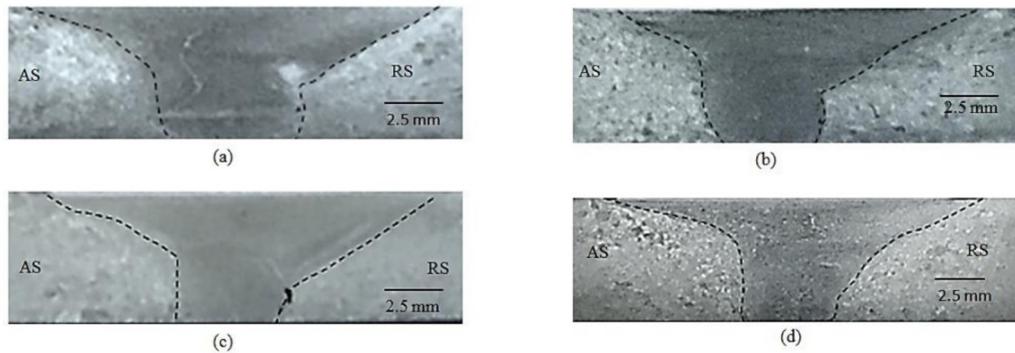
Experimental weld zone: (a) T1: Cylindrical pin tool; (b) T2: Conical pin tool; (c) T3: Cylindrical-Conical pin tool and; (d) T4: Stepped-Conical pin tool
